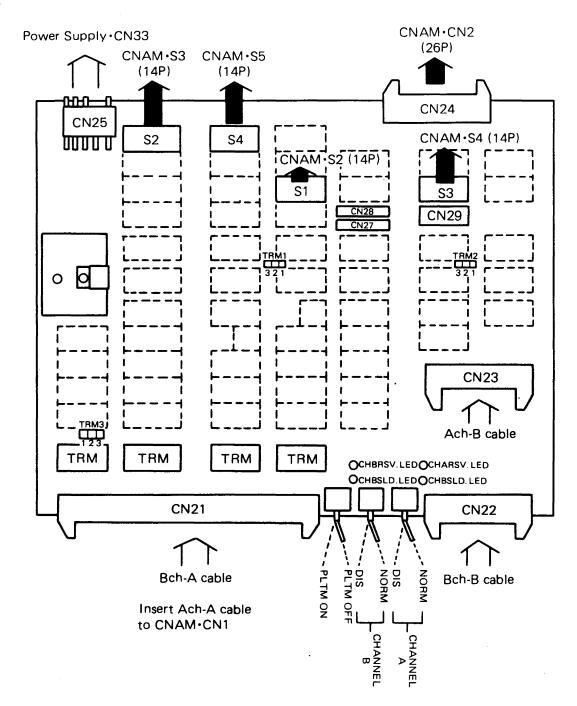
Dual Channel PCB Assembly Connector Location
